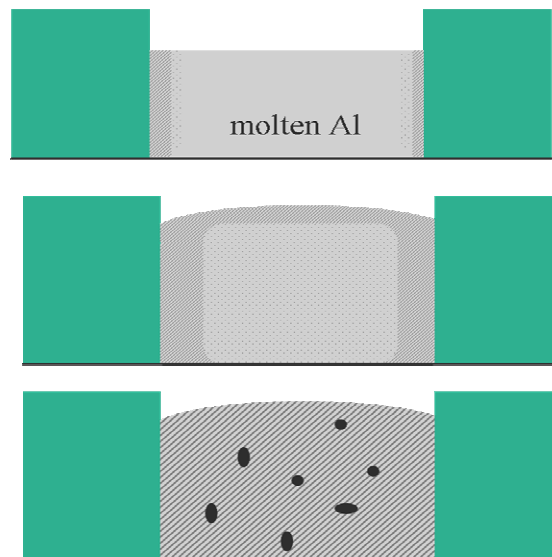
Stages involved in the formation of hydrogen porosity in aluminum castings.
